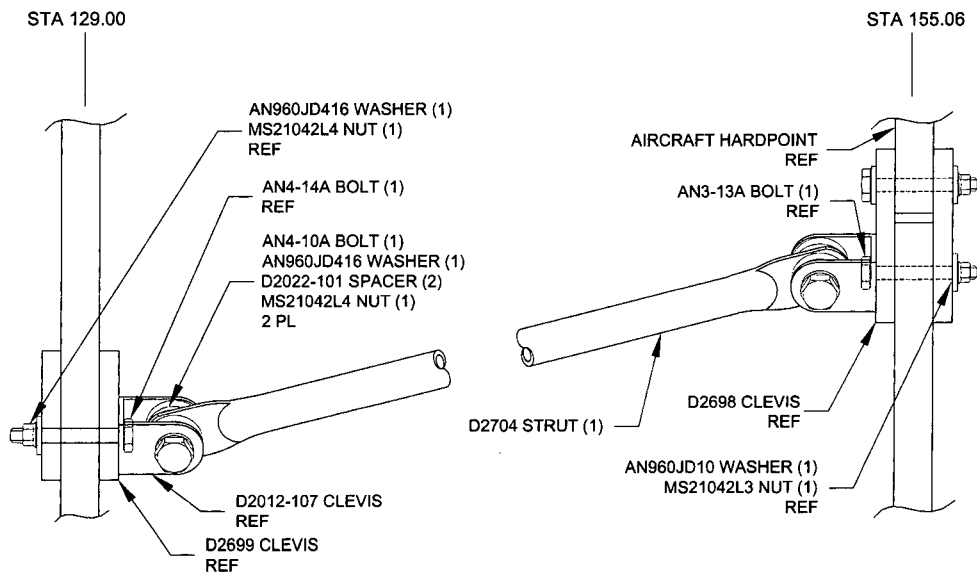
Strut Detail for D412-630-111/-112 Heli-Access-Step™ Installation
